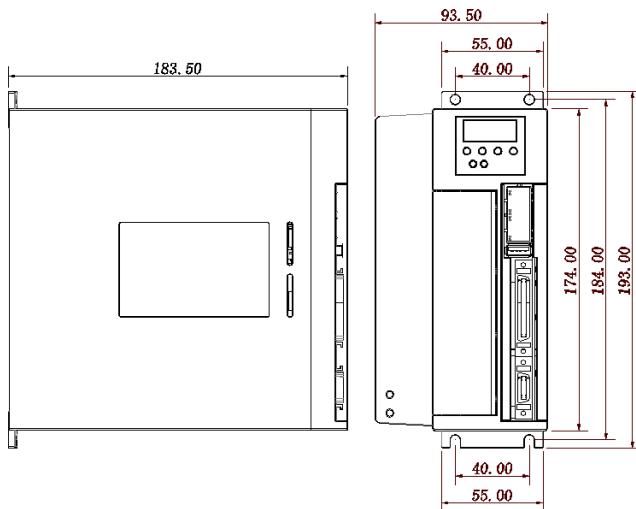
RT10-EA050L appearance and dimensions (Unit, mm)
